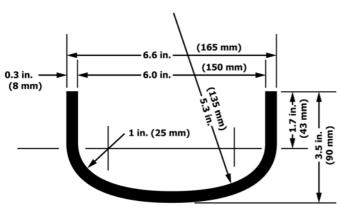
Standard 6 in. (150 mm) Weld Cap
